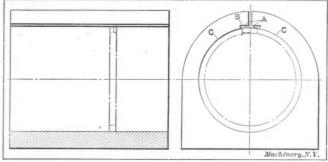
Fixture for Holding the Rings while they are being secured in the Grinding Arbor
